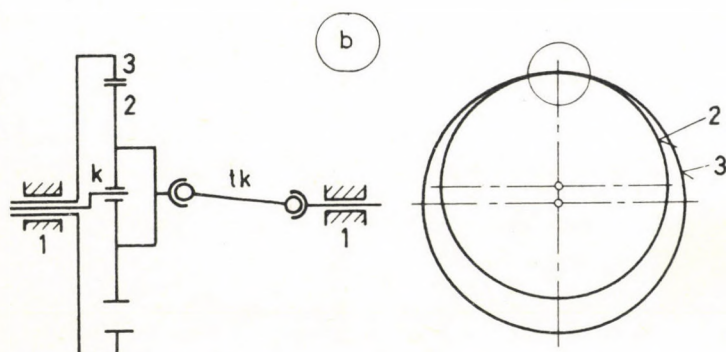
Simplified scheme drawing of epicyclic train, type *b*. 1 case; 2 spur gear, satellite; 3 circular spline, ring wheel; *tk* coupling
